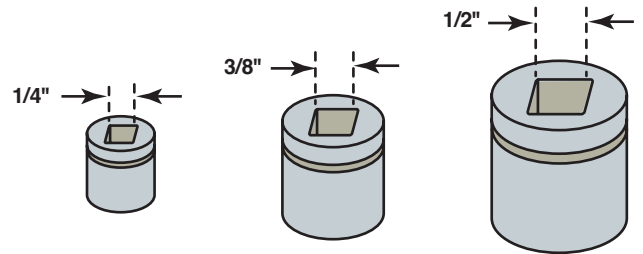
The most commonly used socket drive sizes include 1/4 in., 3/8 in., and 1/2 in. drive.
